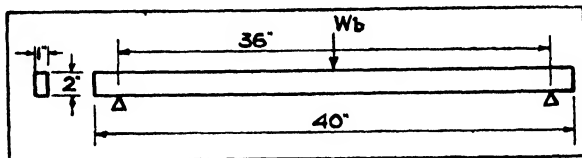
STANDARD TEST PIECE FOR CAST IRON
